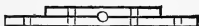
End View of Brass Bearing for Armature Shaft.
